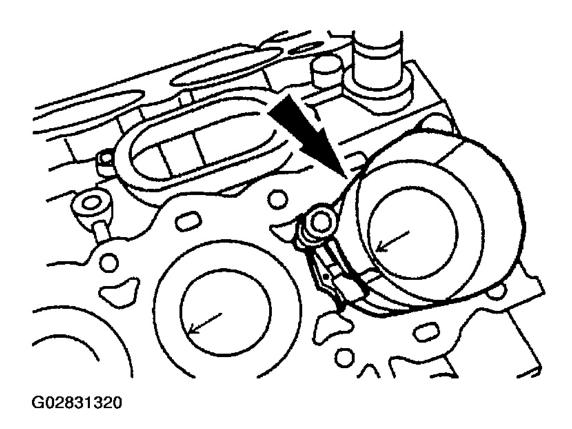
Installing Piston To Cylinder Block Courtesy of MAZDA MOTORS CORP.
